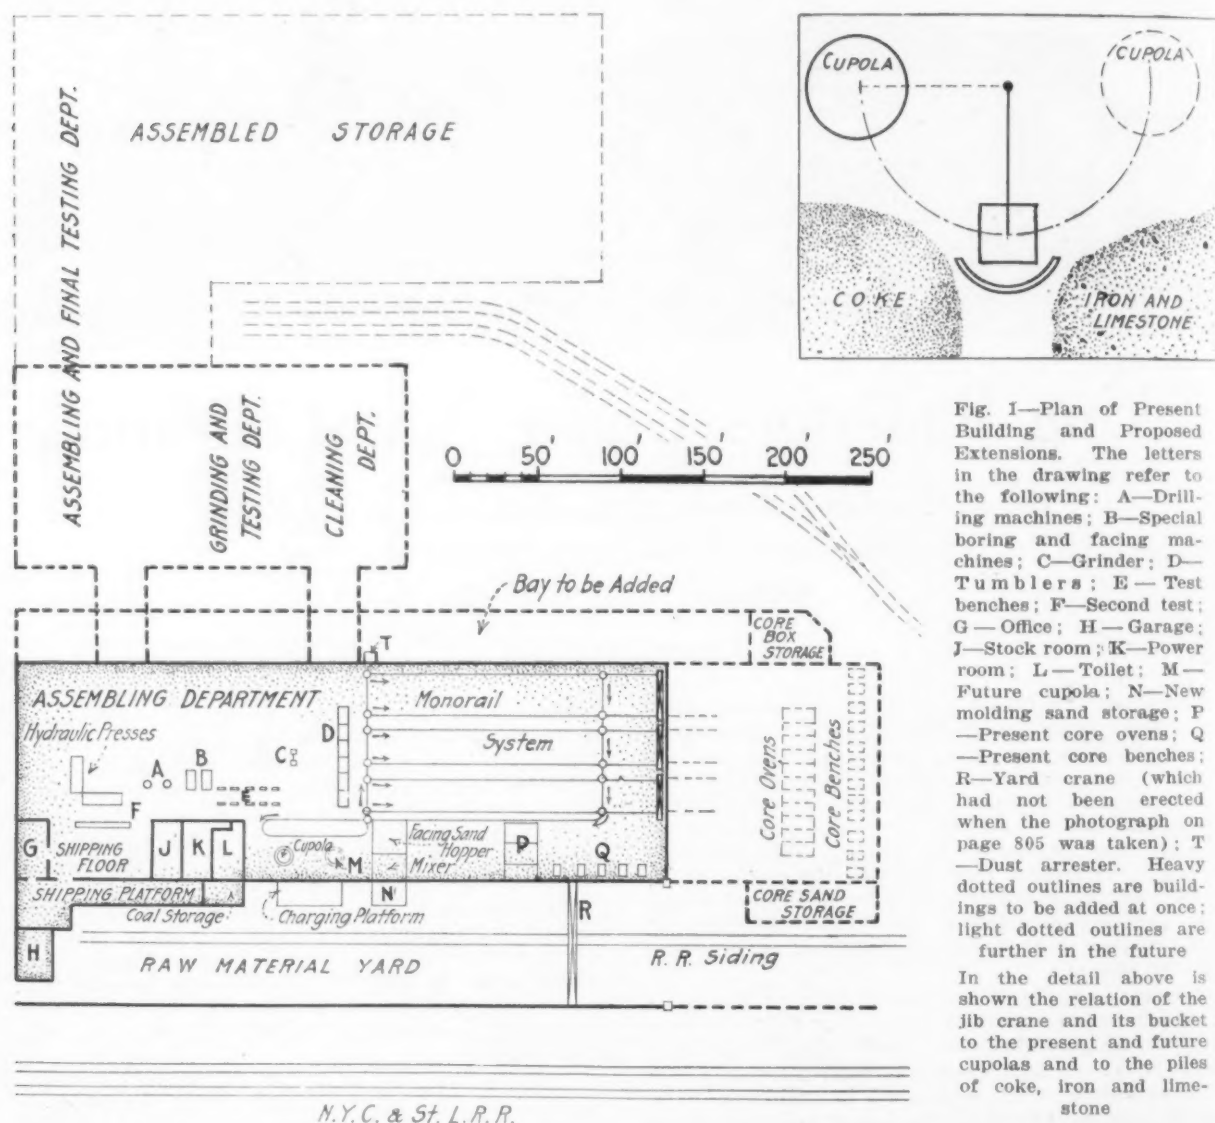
Plan of Present Building and Proposed Extensions. The letters in the drawing refer to the following: A—Drilling machines; B—Special boring and facing machines; C—Grinder; D—Tumblers; E—Test benches; F—Second test; G—Office; H—Garage; J—Stock room; K—Power room; L—Toilet; M—Future cupola; N—New molding sand storage; P—Present core ovens; Q—Present core benches; R—Yard crane (which had not been erected when the photograph on page 805 was taken); T—Dust arrester. Heavy dotted outlines are buildings to be added at once; light dotted outlines are further in the future.
